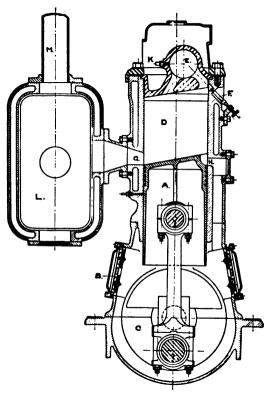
Section of the Bolinder Engine, "E" Type.
